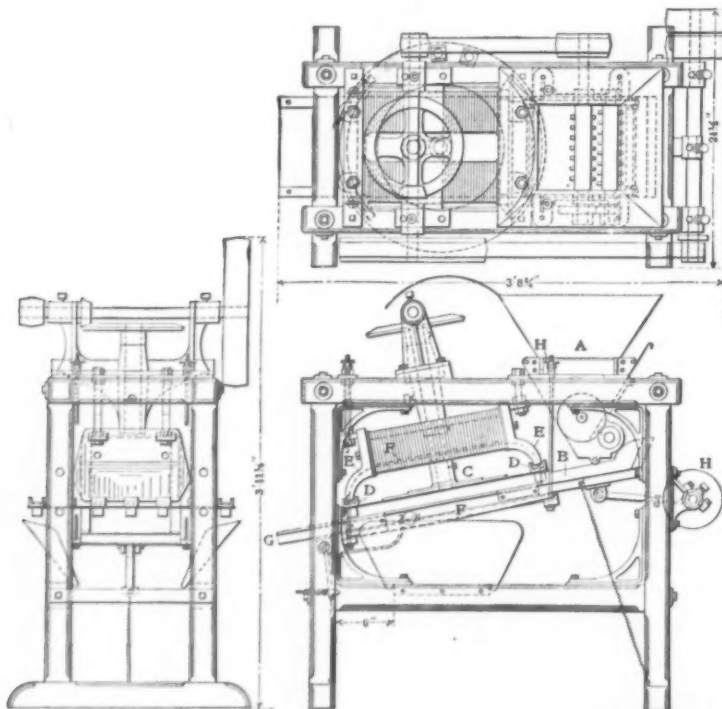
LINE CUT OF THE DISK SEPARATOR SHOWN IN FIG. 1.
